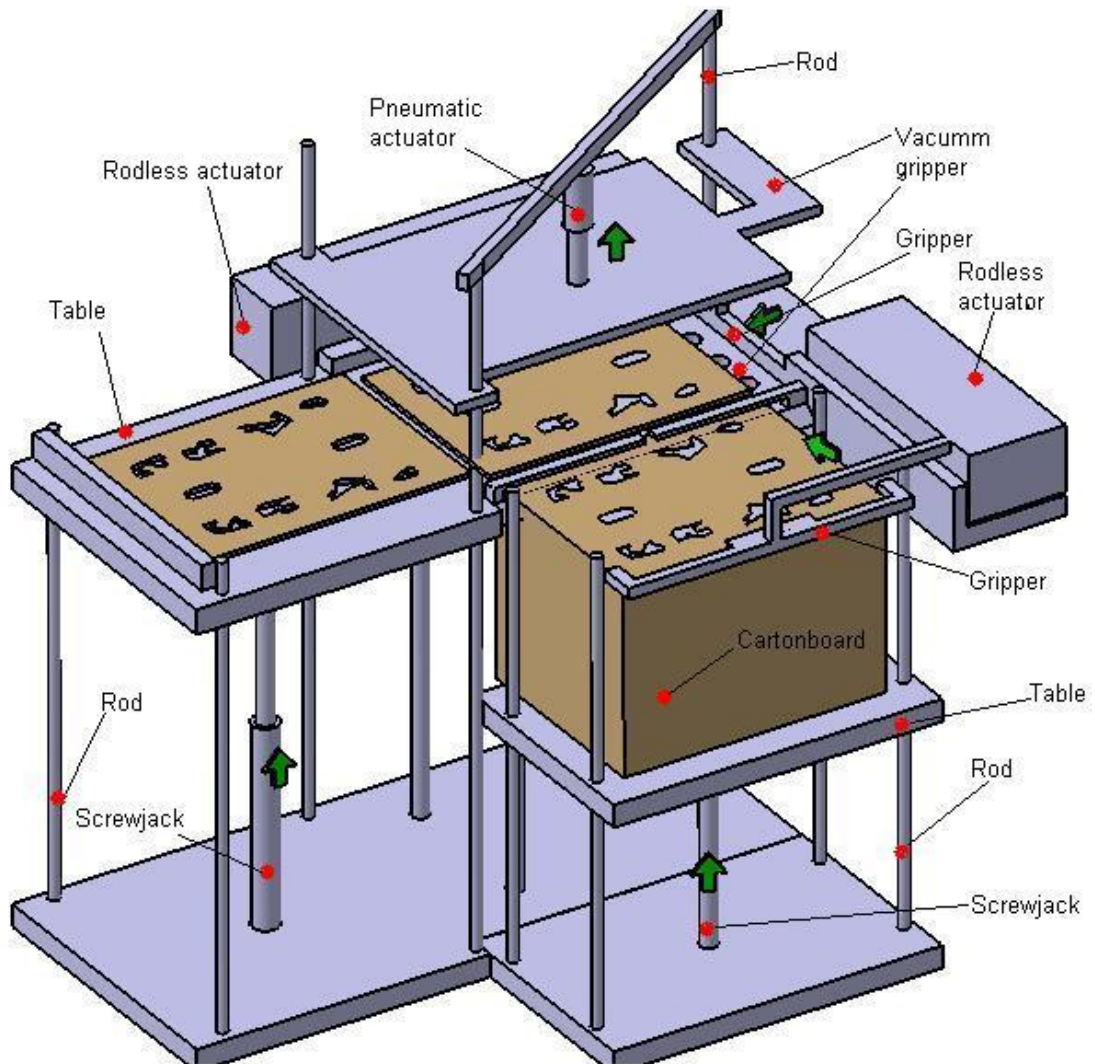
Concept 2: Carton Board Separation Machine Using Vacuum Separation Technique
